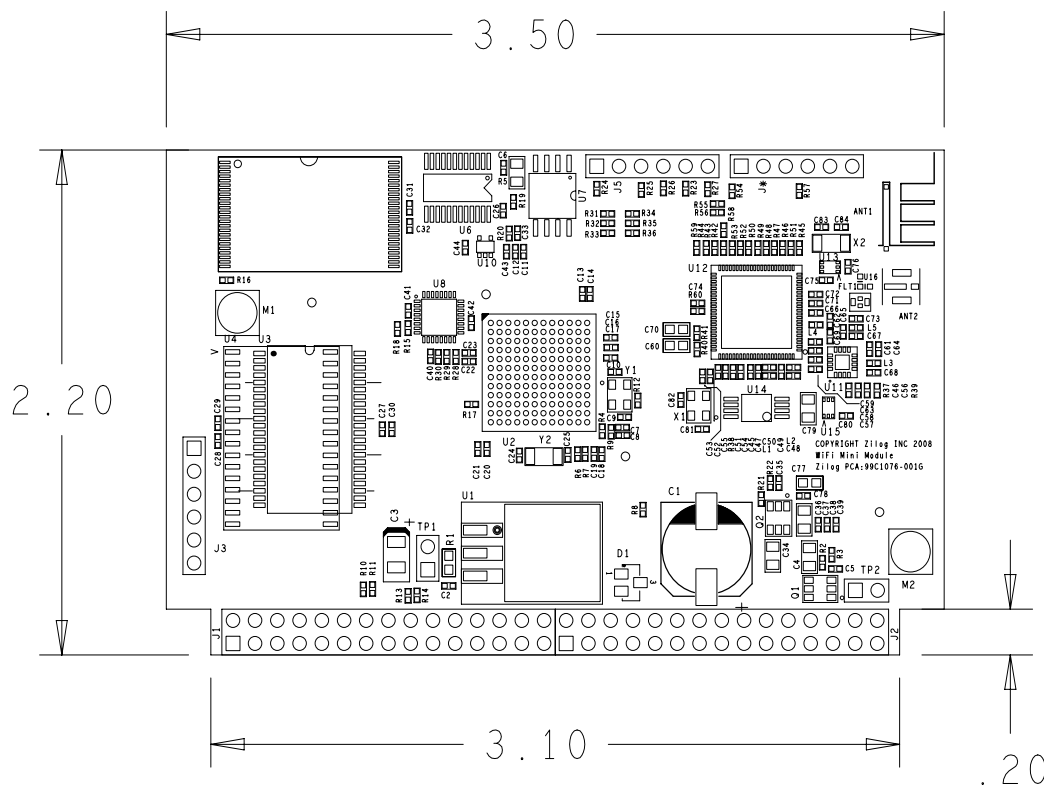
Physical Dimensions of the Wireless Zdots[®] SBC
